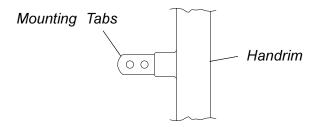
INSTALLING/REPLACING/ ADJUSTING HANDRIMS - SPOKE REAR WHEELS
